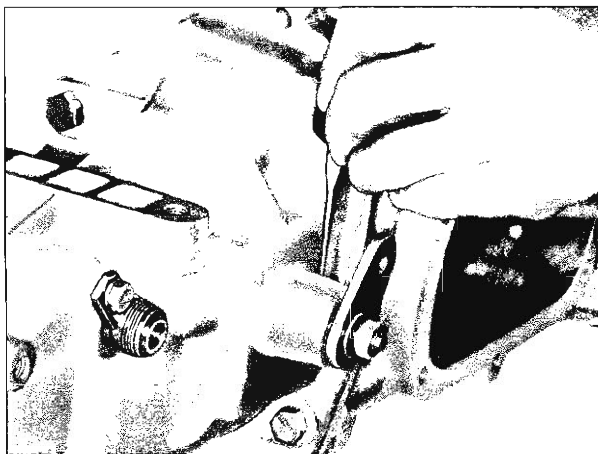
M—Removing Reverse Shifter Shaft Lock Pin
